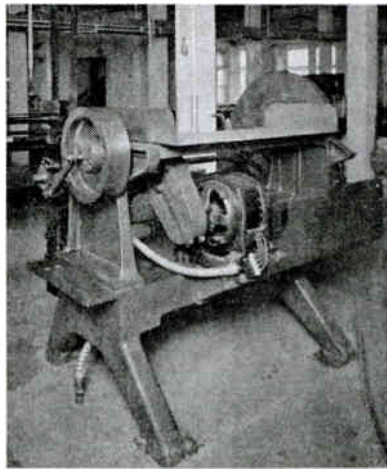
Slicing Machine Individually Driven by Small Induction Motor
